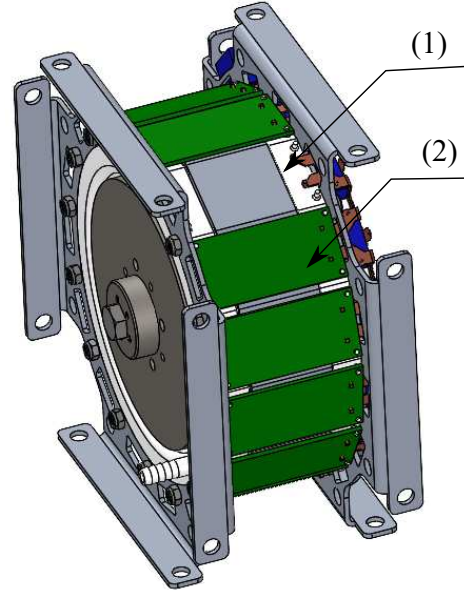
The polygon shaped shared cooling structure with the converter PCB on top: (1) The polygon shared cooling structure, (2) Converter module PCB
